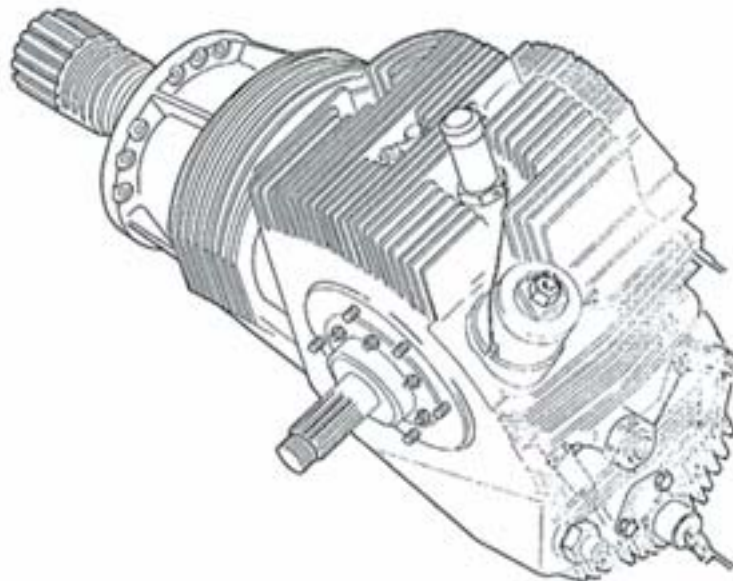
Nose Gearbox Assembly, Left (AH-64A/D)
